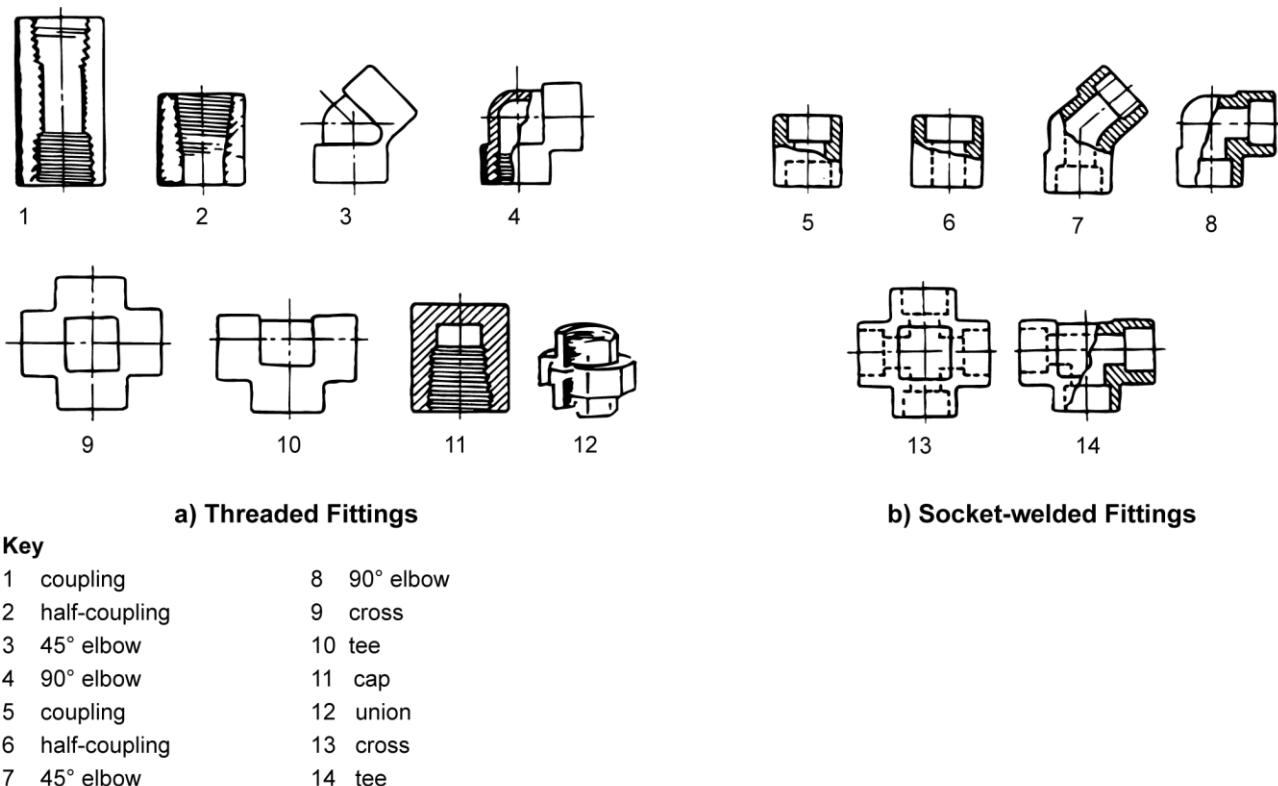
Forged Steel Threaded and Socket-welded Fittings
